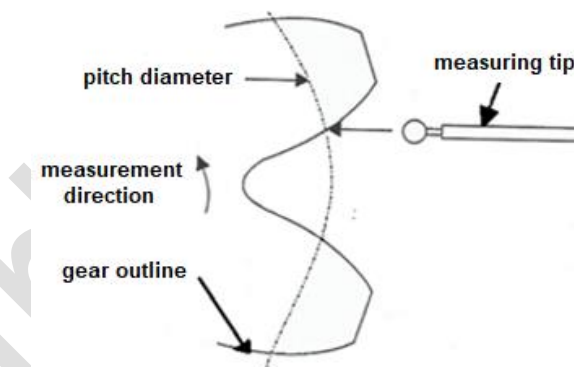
Contact method of measuring a gear wheel on a specialized machine.
